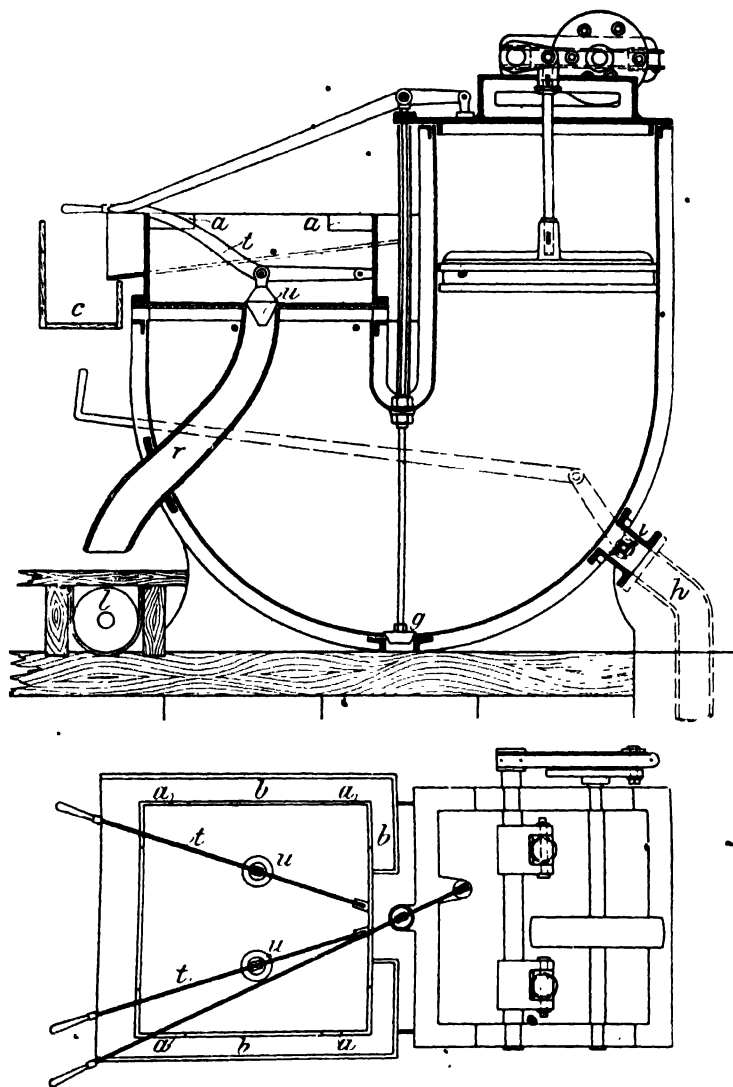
Cross-Section and Plan of Early Sieves Wash-box.
